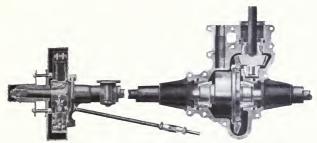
Shaft-Drive Rear Axle, Rear Vertical View at Left, Horizontal View at Right. Timken Roller Bearing Axle Company, Canton, Ohio.
